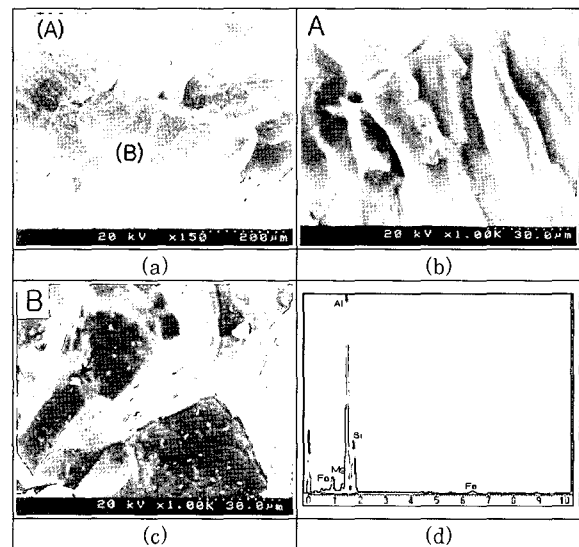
SEM fractographs of 6N01 welds in the hot cracking test, (a) fracture facet of the crack, (b) A part on (a), (c) B part on (a) and (d) EDX analysis of the particle on (c)
